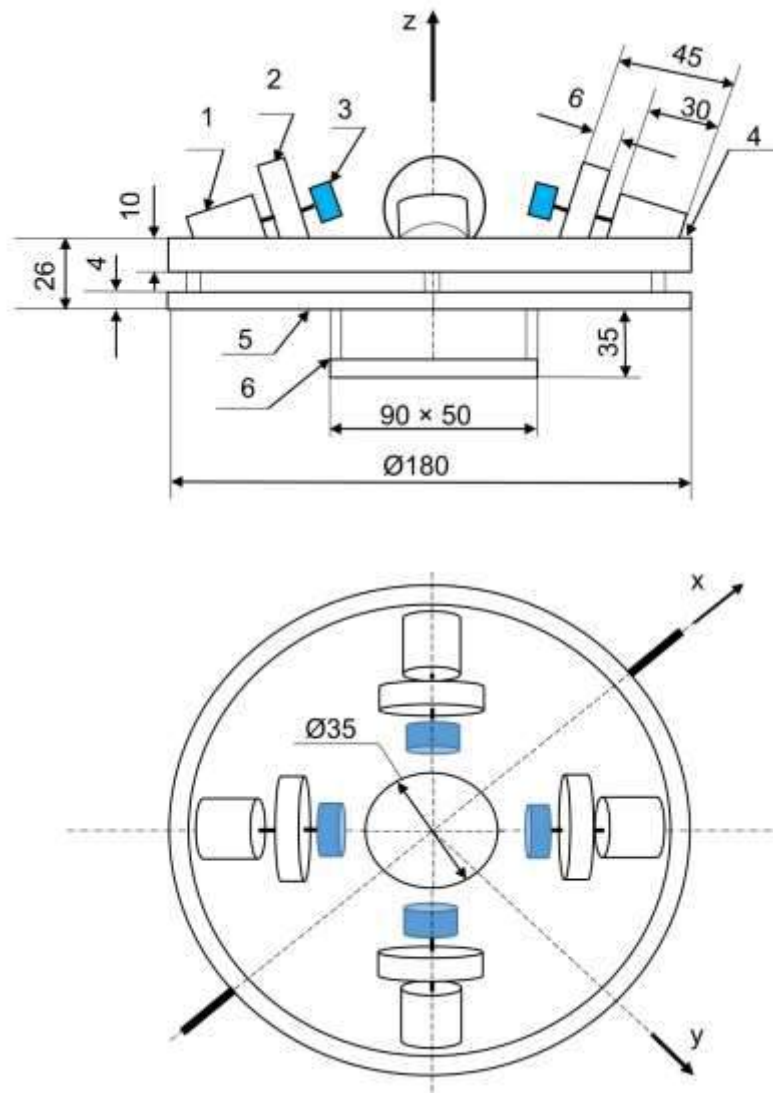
View of the construction of the model unit of electric flywheel motors
